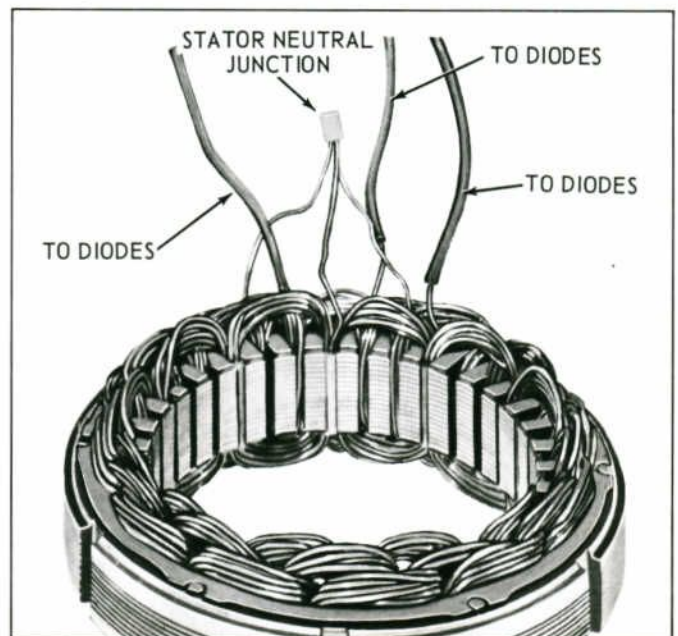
STATOR CORE AND COIL ASSEMBLY
